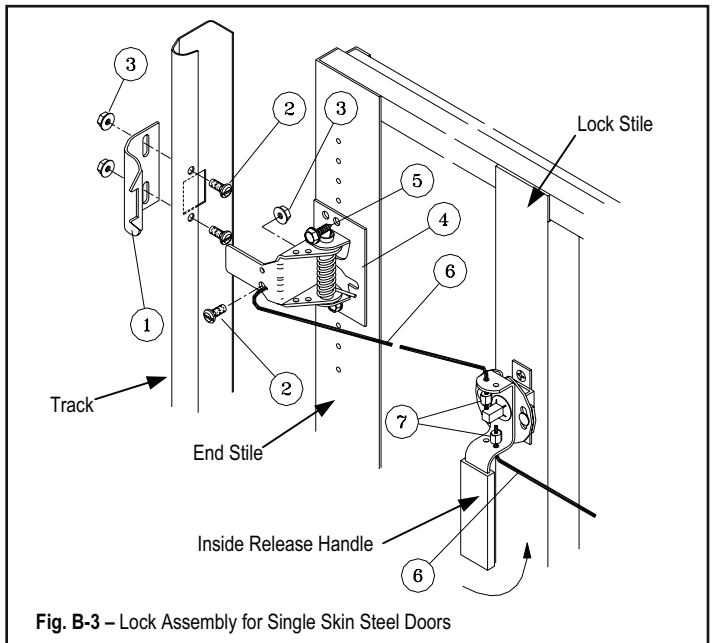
Lock Assembly for Single Skin Steel Doors
